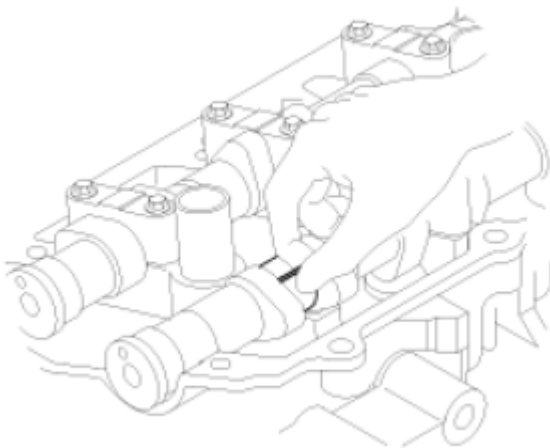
Inspecting Camshaft Journal Clearance
